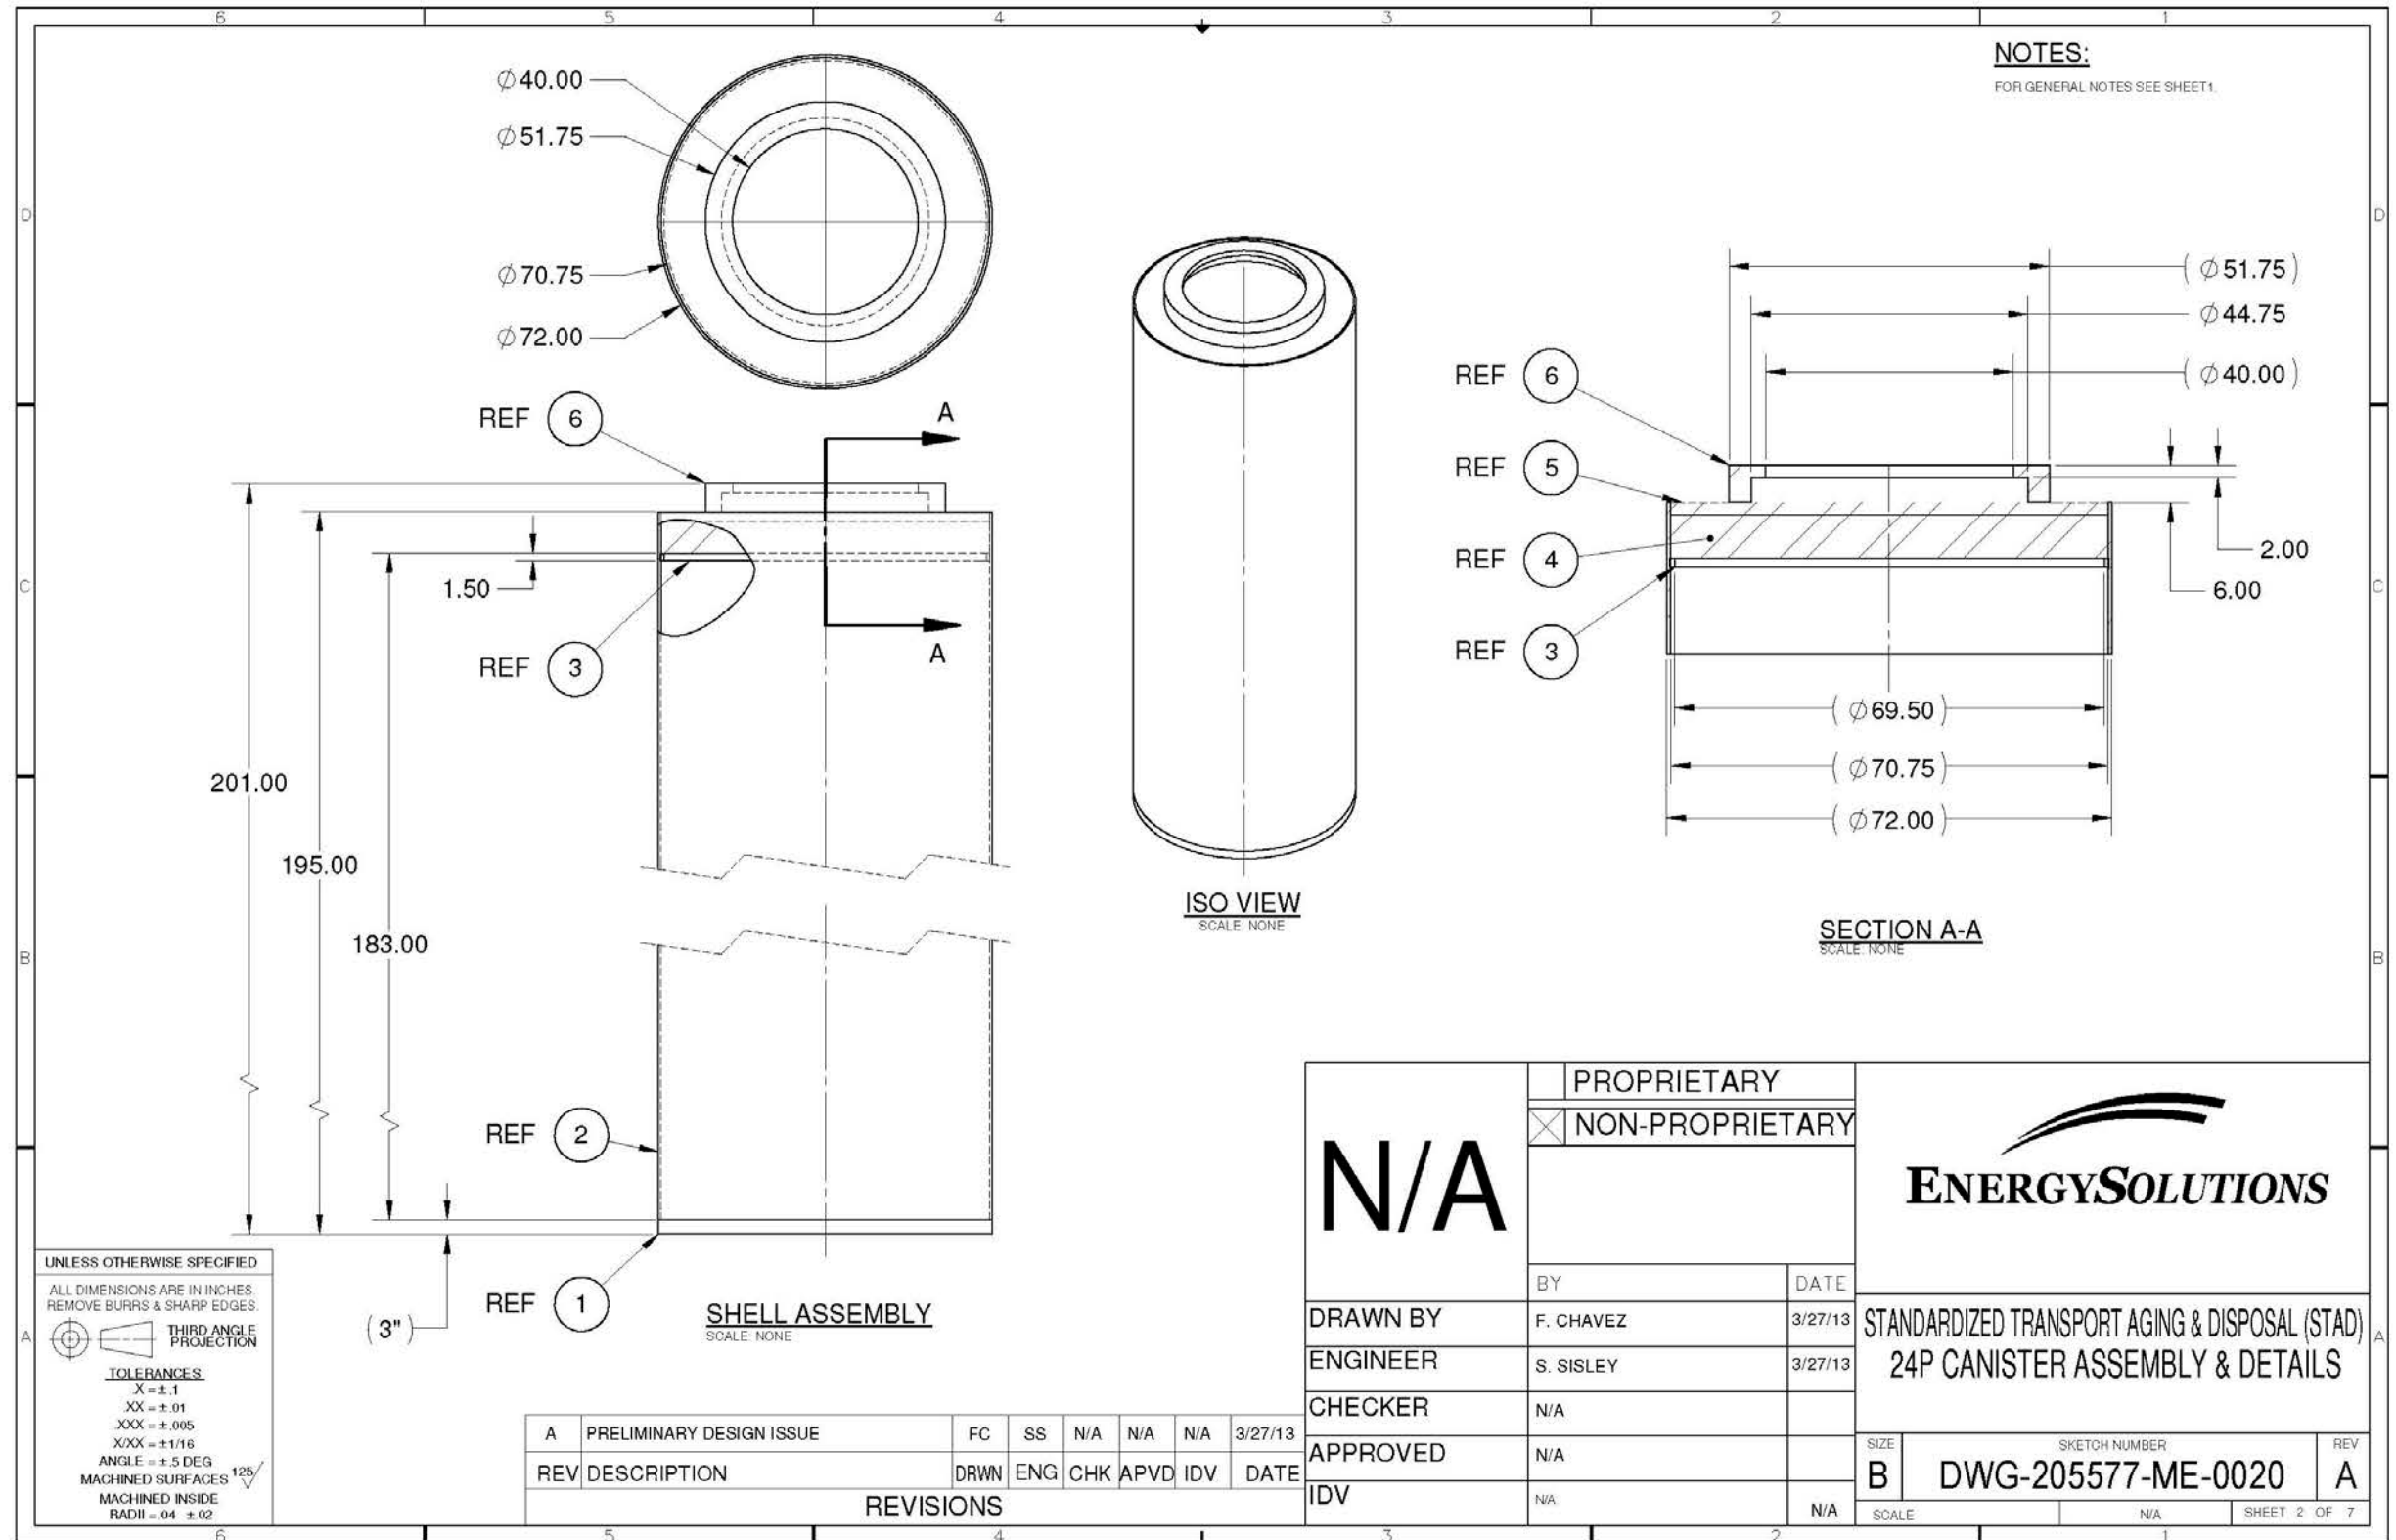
Standardized Transport, Aging and Disposal Canister - 24 PWR Assemblies - Assembly & Details – Sheet 3 of 7
